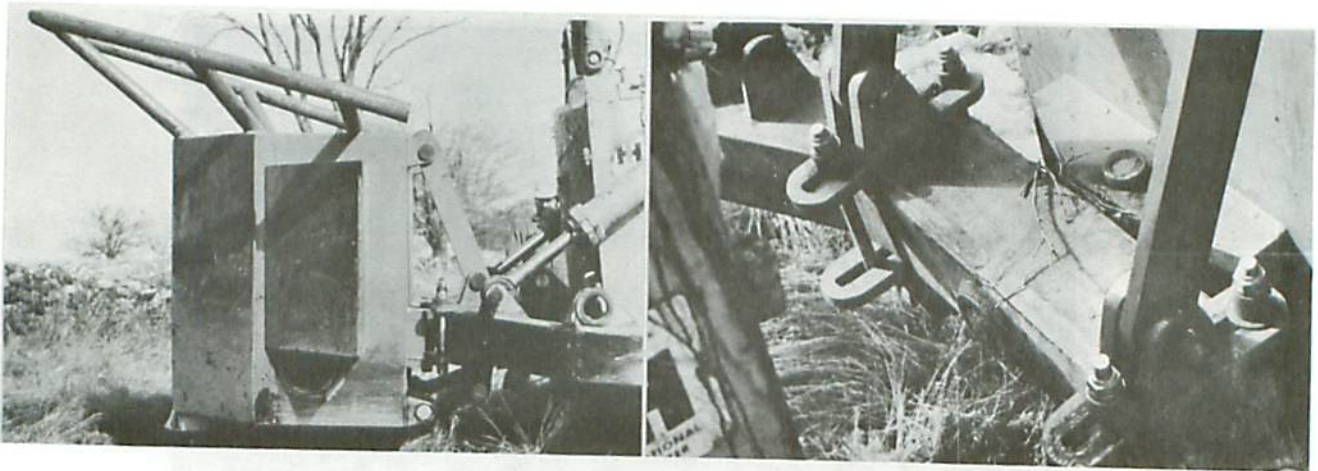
Method of attaching modified V-blade showing (left) fixed-radius trunnion arms at the rear of the V-blade, and (right) adjustable, slotted clamps with ears, bolted onto the bulldozer C-frame.
